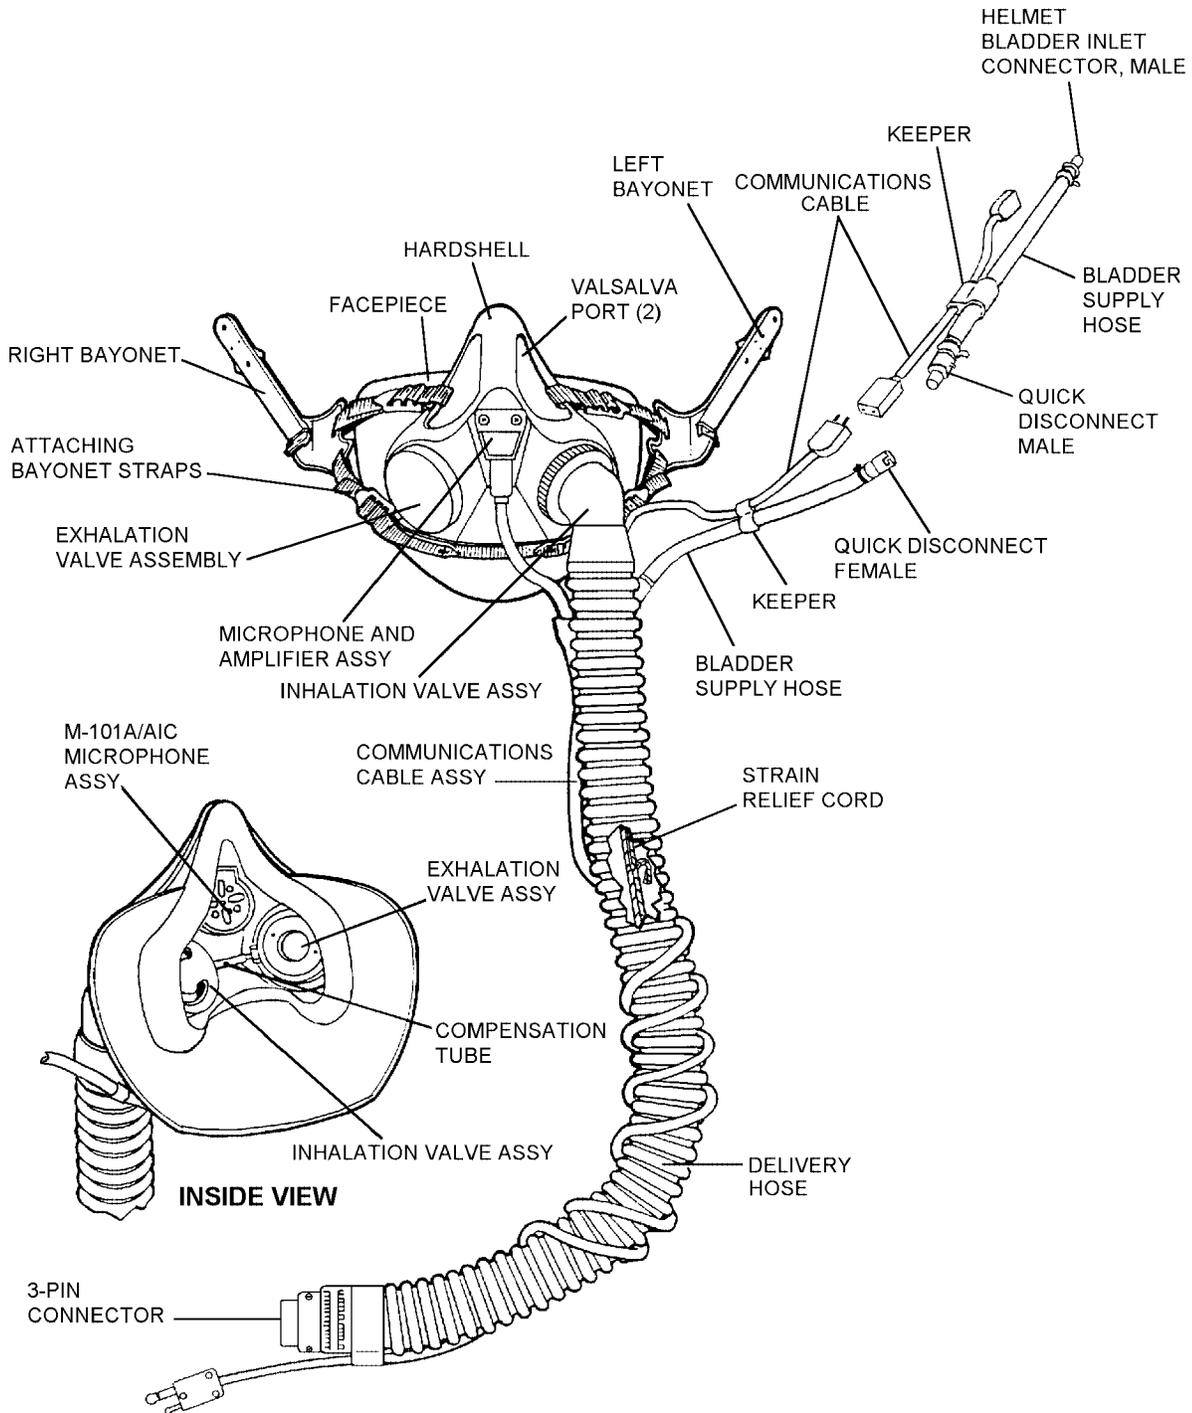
MBU-24/P22P-16 Enhanced Pressure - Demand Oxygen Mask Assembly
